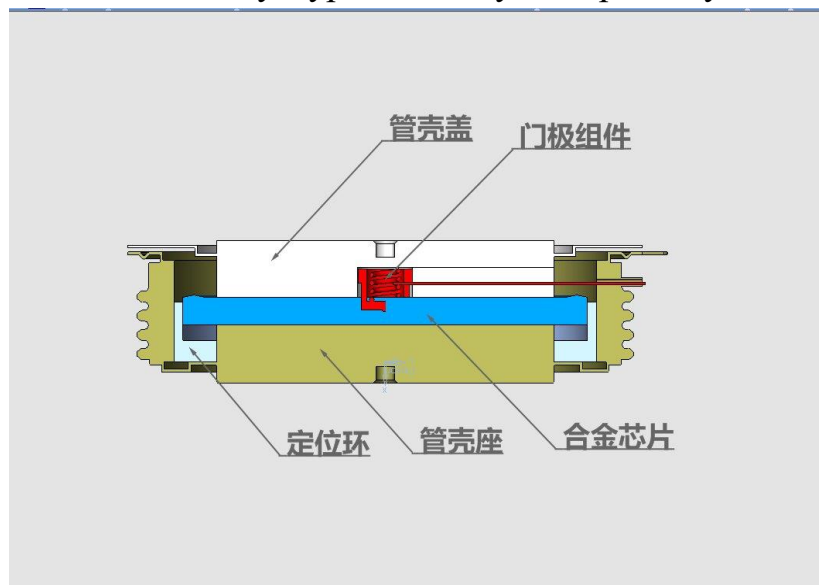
Cross-sectional view of alloy-type thyristor packaging
